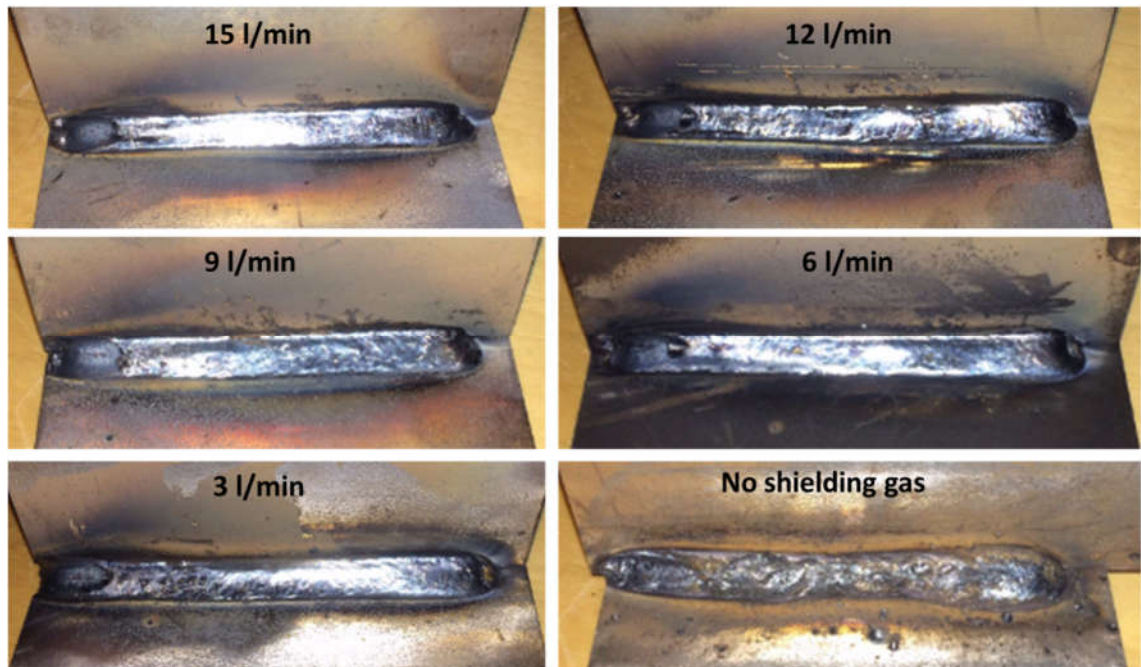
FCAW-G fillet weld samples produced at varying input flowrate. Good welds were achieved even with 3 l/min.
